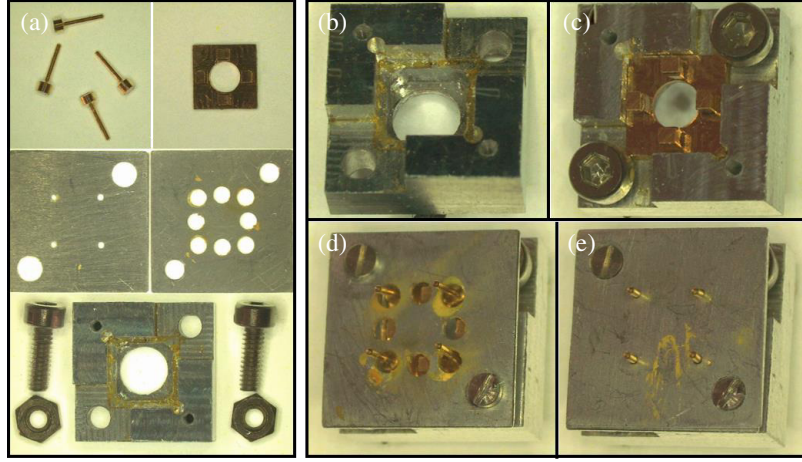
Photographs instructing the contacting of mask holder with contact pins. Top frame: (a) All required parts including male gold pins, mask holder, two alignment Al plates and an assisting chuck with screws. (b) Assisting chuck. (c) Mask holder placed in assisting chuck. (d) Al plate with larger holes inserted and gold pins attached through the Al plate. (e) Al plate with smaller holes inserted to align the gold pins.
